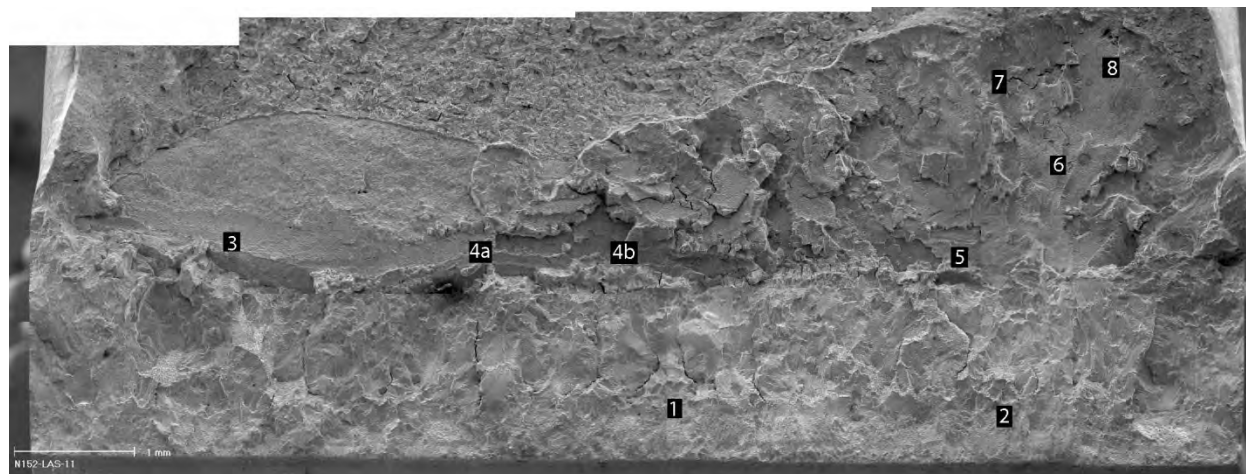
Fracture surface of specimen N152-LAS-11. Crack advance is from bottom to top.
